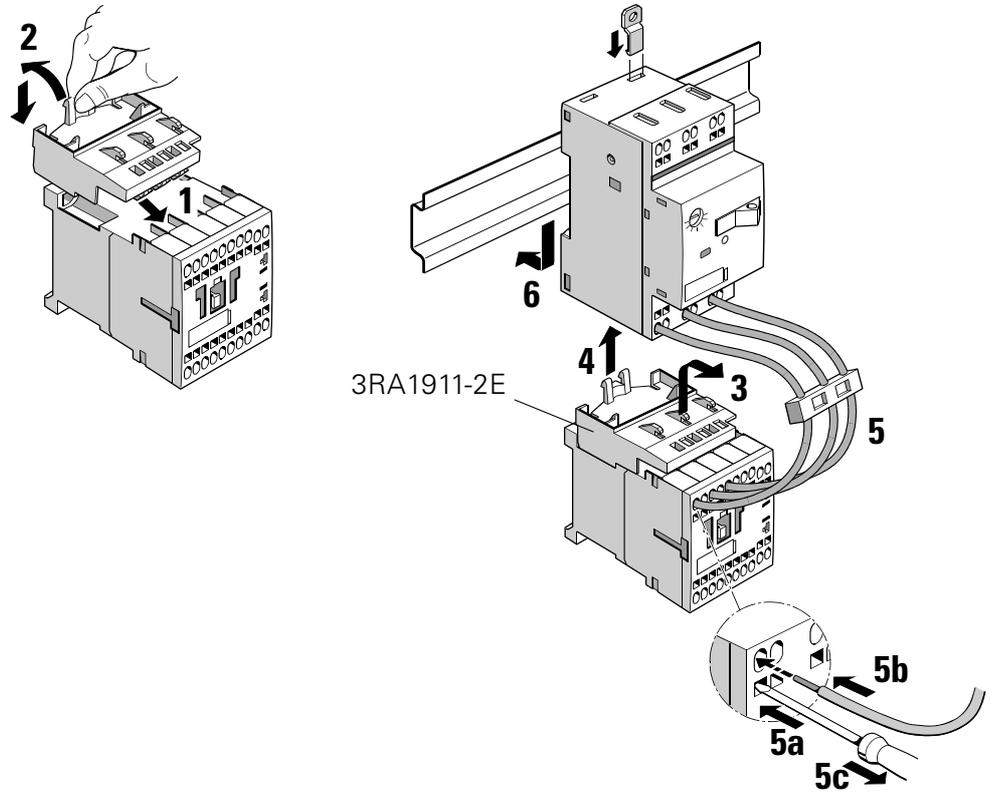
Self-assembly, rail, direct starter (frame size S00, Cage Clamp)
